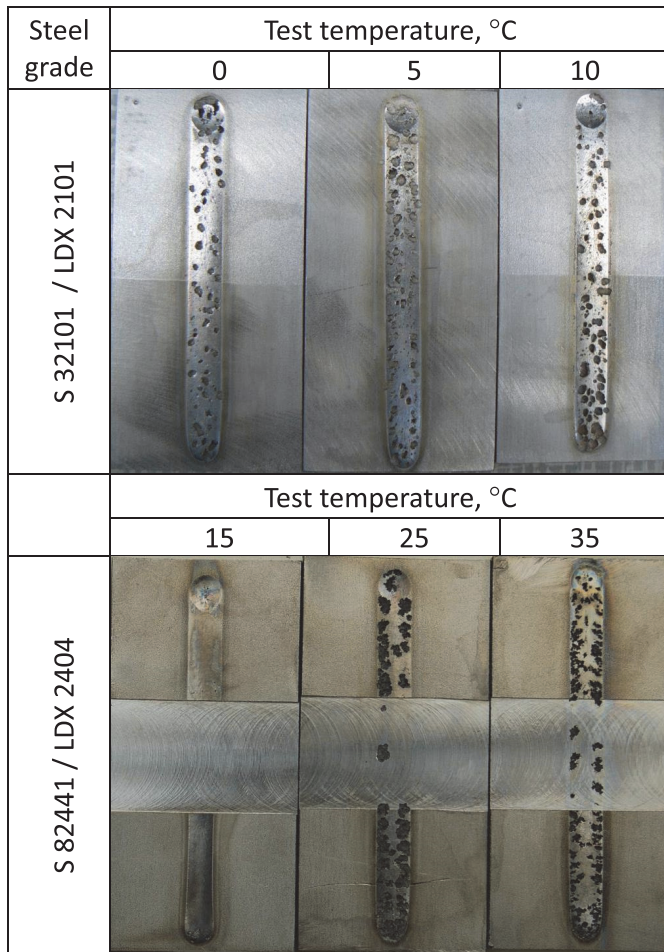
The TIG welded joint of stainless steel S32101 and S82441 made with Ar shielding and welding current of 150A after corrosion test ASTM G48
